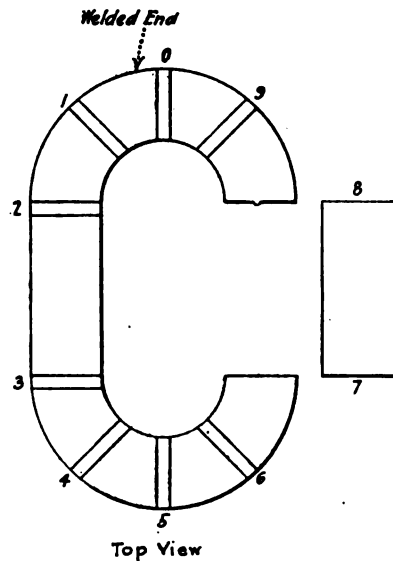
LOCATION OF TEST SPECIMENS IN LINK
